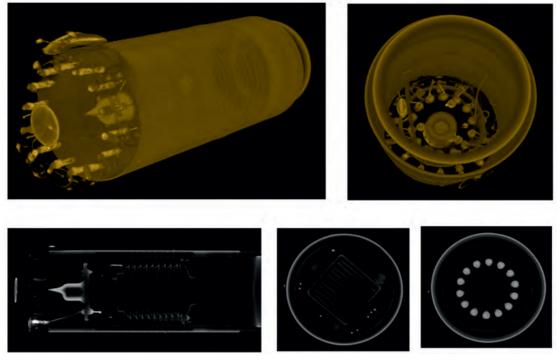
3D reconstructed volume, cut-away view and cross-sectional images showing different parts of the PMT assembly such as dynode structure, joints and stainless steel cover
